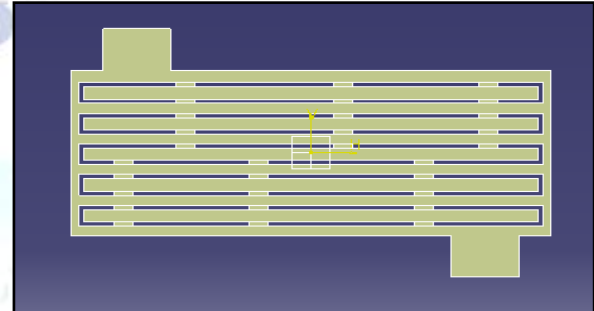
surface design of shell and tube heat exchanger with 6 baffles
